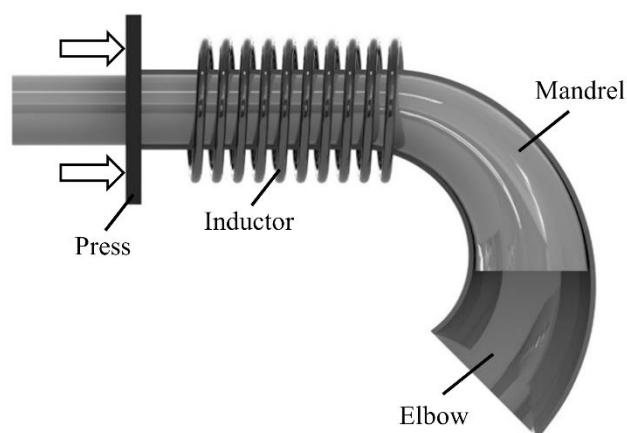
Hot mandrel bending of pipe elbows ('Hamburg Process')
